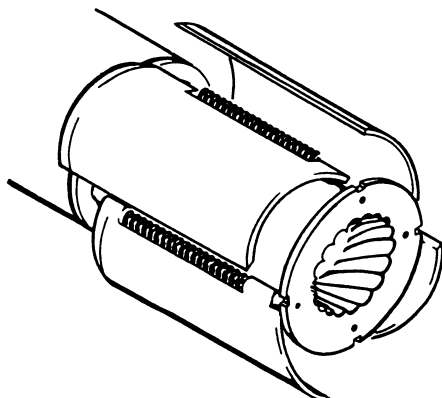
Mk 71 Mod 0 motor, nozzle, and fin assembly.
